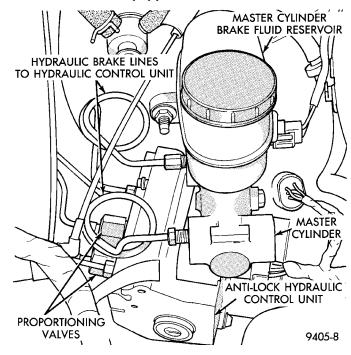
Master Cylinder For Anti-Lock Brake Equipped Vehicles
